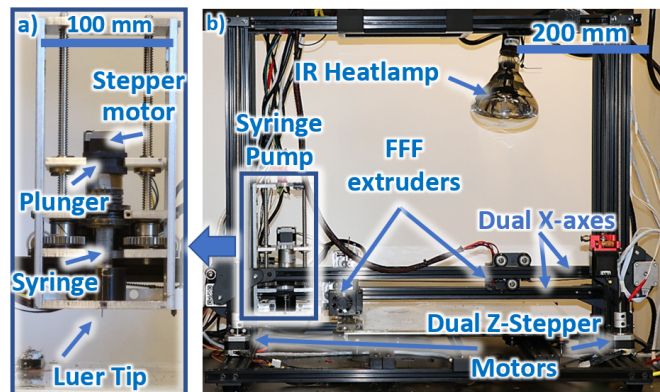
Custom multi-material 3D printer is shown. a) The custom syringe pump system for printing AgNP ink includes stepper motors, gears, plungers, and a syringe. b) The full system also includes FFF extruders, dual X-axes, and an IR heatlamp for curing AgNP ink.
